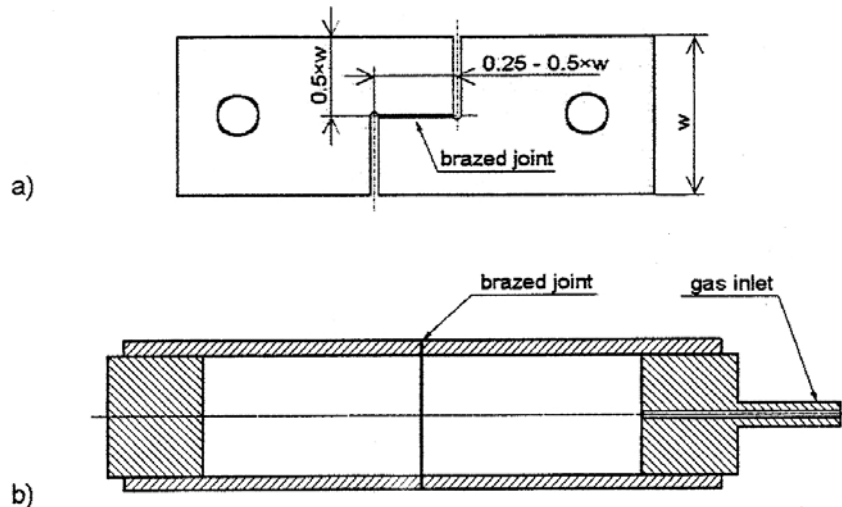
Specimens used for (a) shear creep testing, and (b) for internal pressure creep testing (after Holstrom et al.²²).
